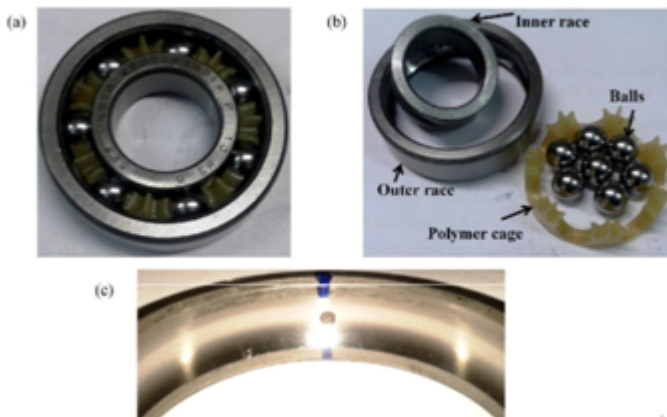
Image of the test bearing and the defect (a) test bearing (b) components of the test bearing (c) circular deflection outer race
